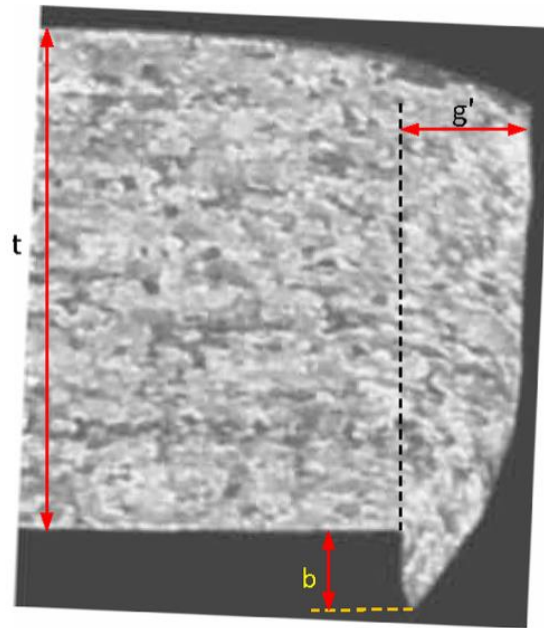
Blank thickness (t), The burr height (b), final cutting clearance (g), and cutting with a 21% clearance measure [174].
